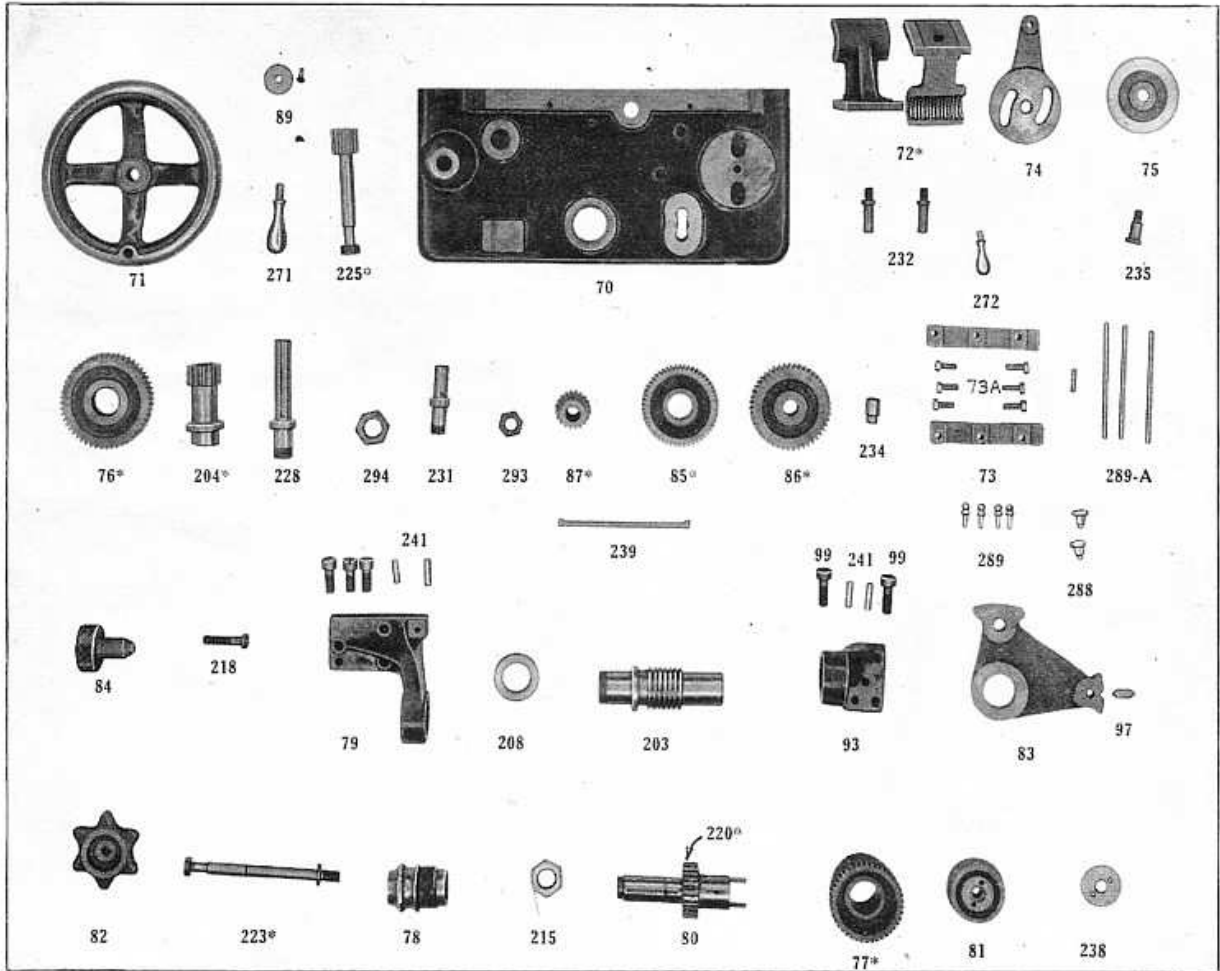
Apron Parts for Quick Change Gear and Standard Change Gear Lathes.
